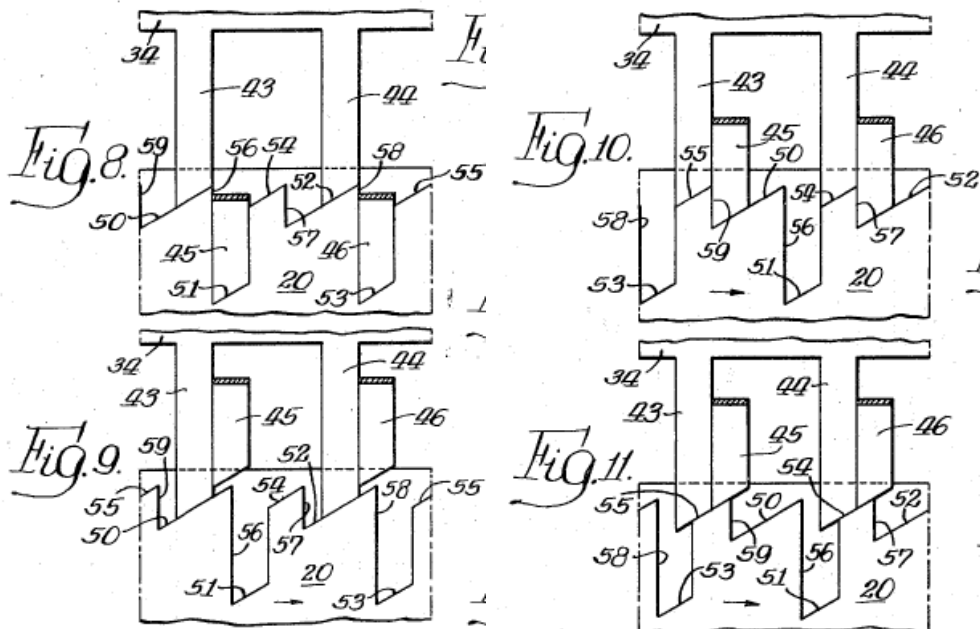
shows an exploded view of the point-and-cartridge unit and projecting-retracting mechanism. *Id.* at 2:57–59. Secured to the rear of ink reservoir section 10 is cam body 20 which is part of the projecting-retracting mechanism. *Id.* at 3:49–53. Cam body 20 is rotatably and slidably disposed within stationary guide member 28. *Id.* at 3:65–67. Tubular plunger 34 is formed with push button 35, which is biased rearwardly by spring 38. *Id.* at 4:1–2, 4:75–5:1. Fingers 43, 44 are formed integrally with plunger 34 and extend forwardly. *Id.* at 4:10–12. Figures 8–11 of Rhoades are reproduced below.
